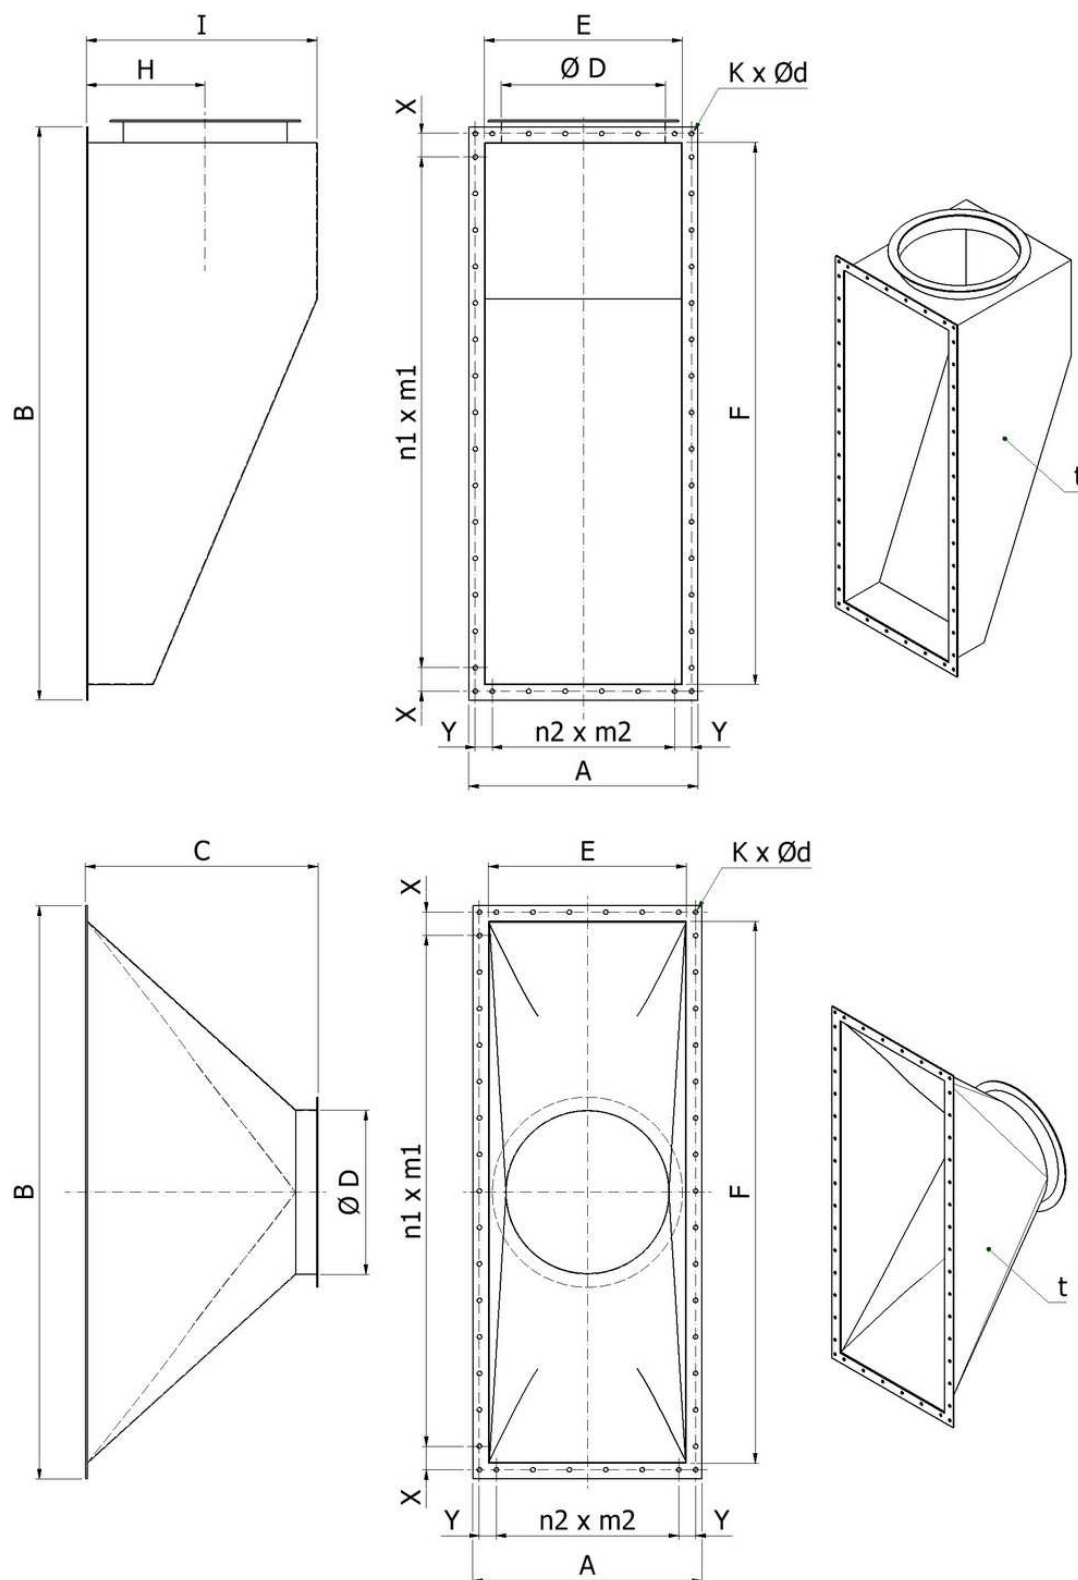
Main dimensions of the VSS 2 connecting parts, solid right-hand model
